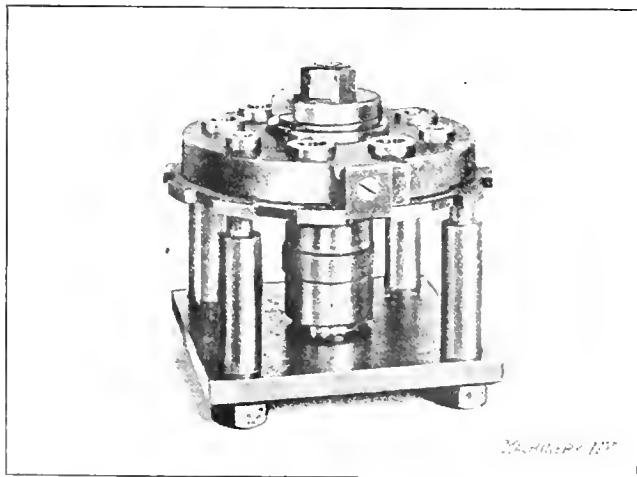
Jig for Drilling the Bolt and Pivot Holes in the Gear Case Covers. Another Jig for the Same Operation is shown at the Left of Fig. 5
